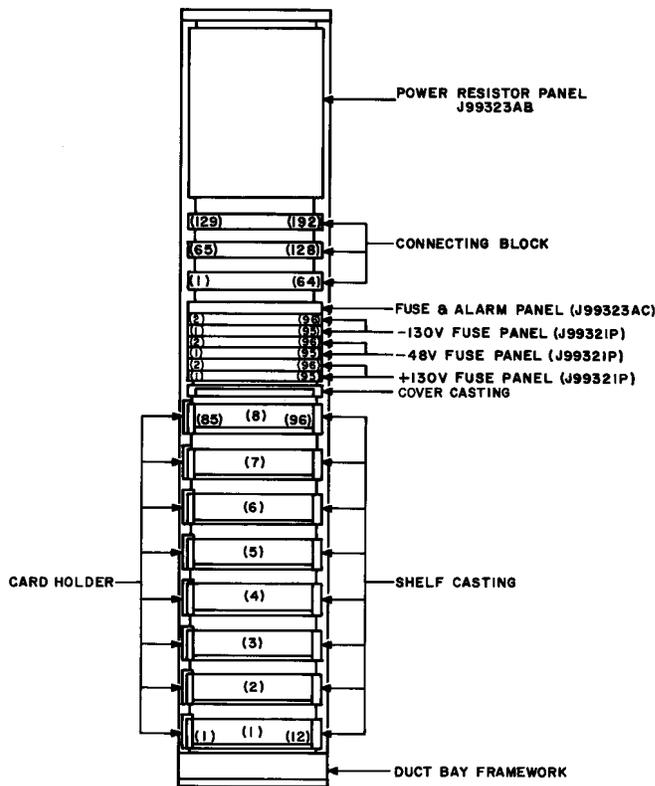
J99323B N2 Line Build-Out Bay Equipped with Line Protectors and Power Feed (11 Feet 6 Inches High by 26-3/8 Inches Wide)
